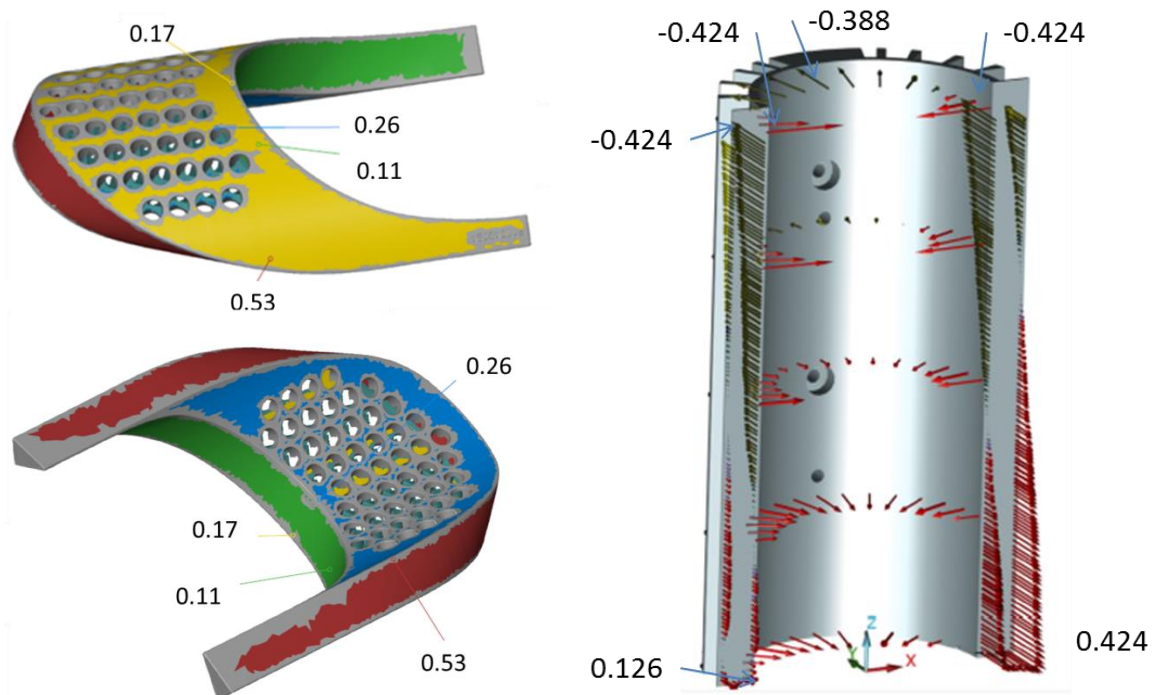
CMM measurements of surface deviation from CAD for 3D coil wedge (left) and straight section part of SMCT coil (right). The numbers in the pictures are in mm.
